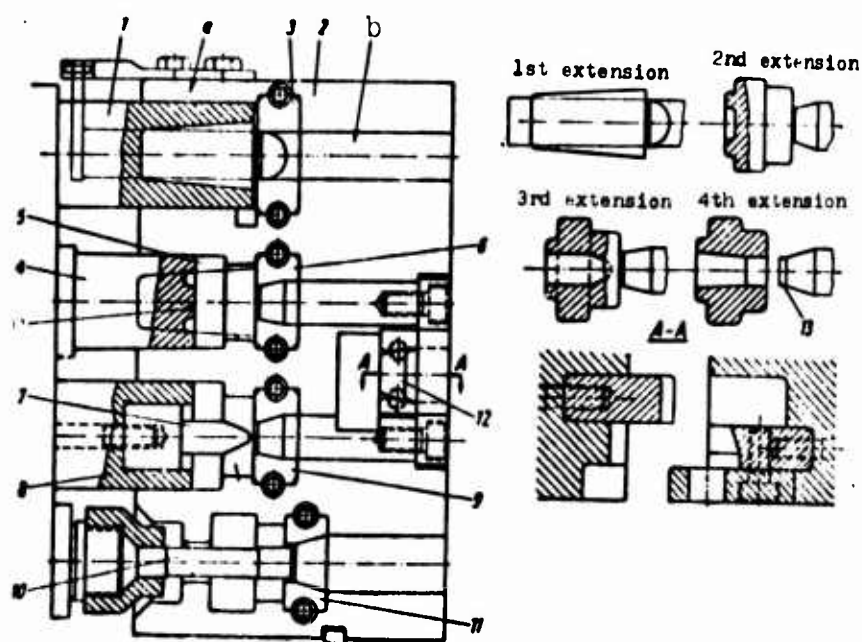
Example of construction of a die to a horizontal-forging machine.
